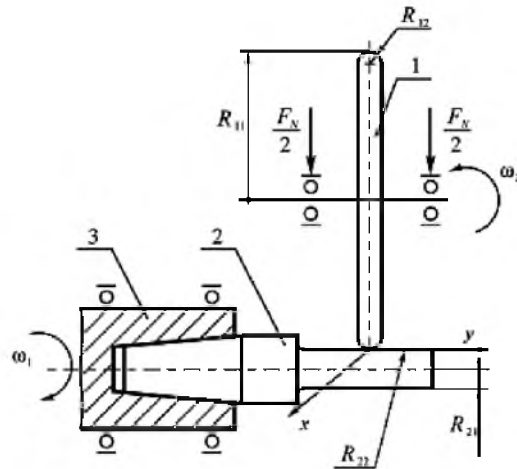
Testing scheme for a toothed gearing model: (1) sample-model of the tooth; (2) counterbody (roller); (3) testing machine spindle.
